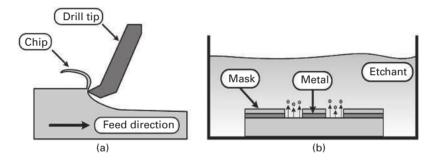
Subtractive fabrication methods: (a) milling and (b) wet etching.
